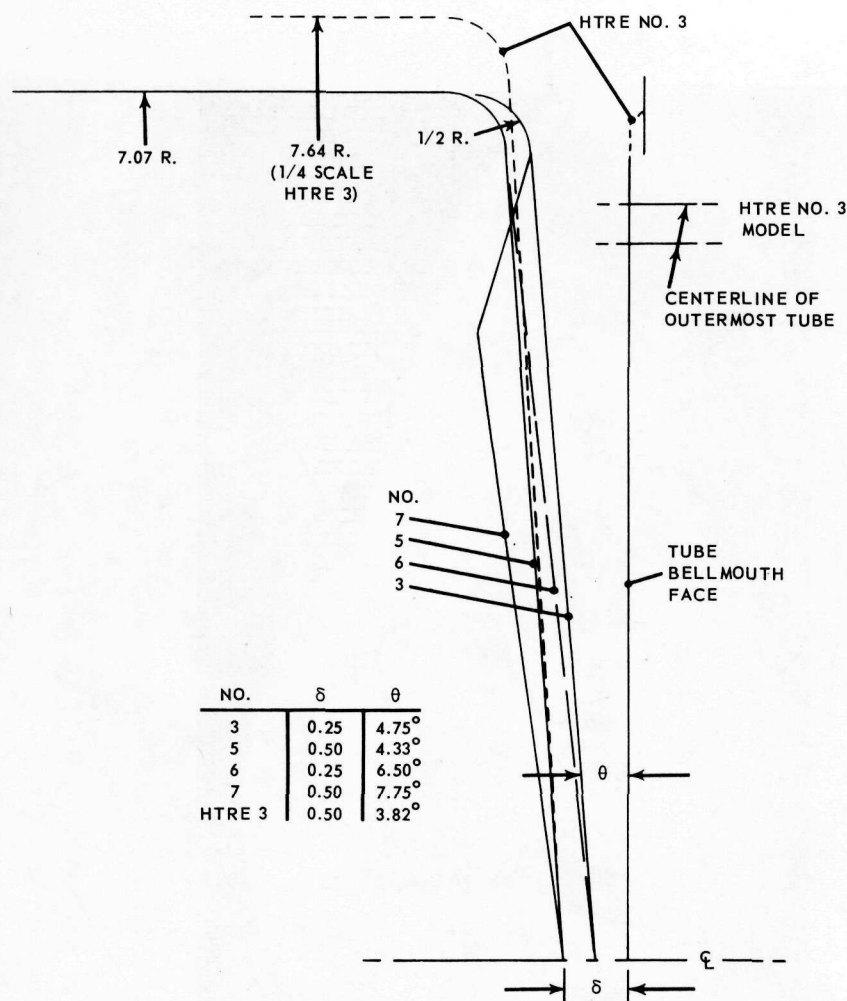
Configuration of several front shield plugs tested for the HTRE No. 3
